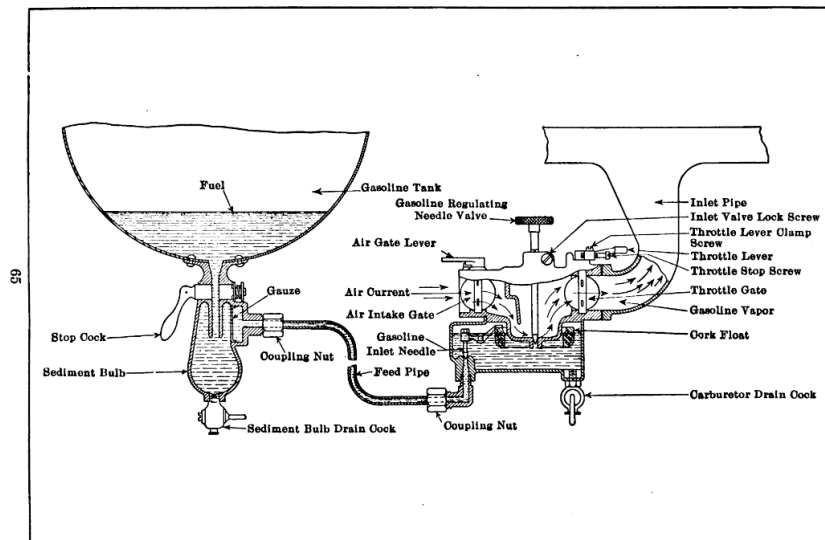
The Ford Model T Fuel Supply and Gas Making System.
